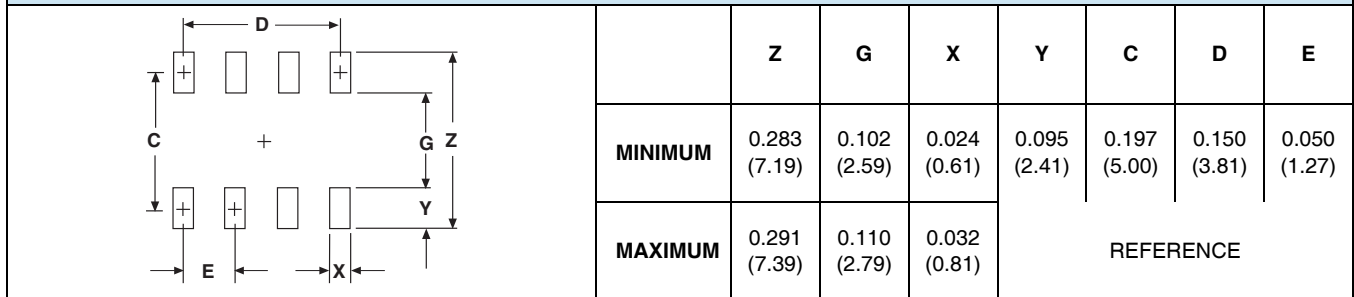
DIMENSIONS AND IMPRINTING EXAMPLE in inches (millimeters)
